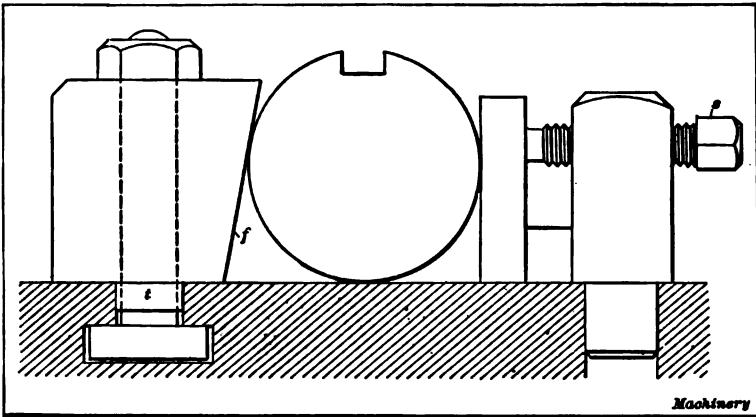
Method of Holding Shaft for Splining or Keyseating
